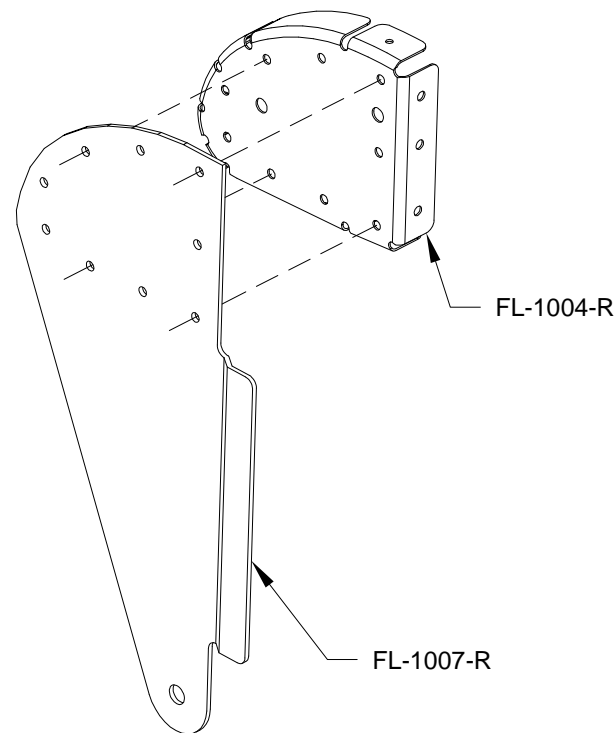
RIGHT HINGE PAIR RIB SUBASSEMBLY
